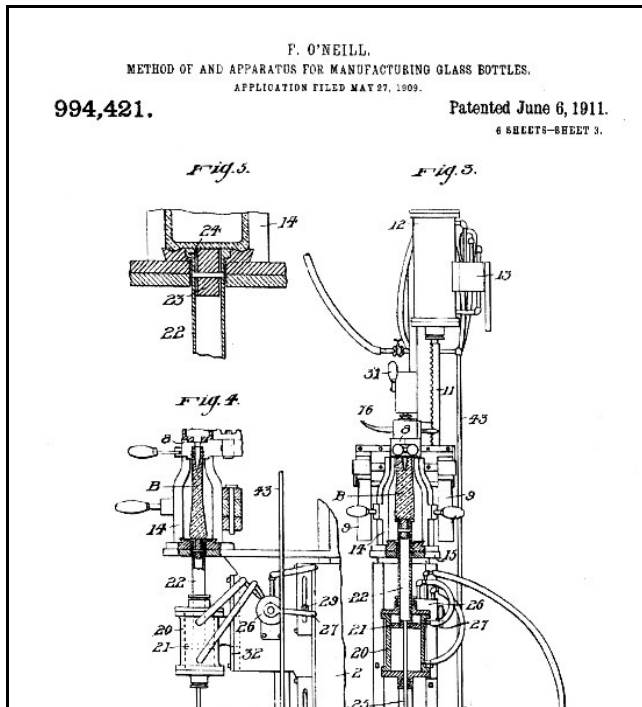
O’Neill’s 1911 machine patent drawing
